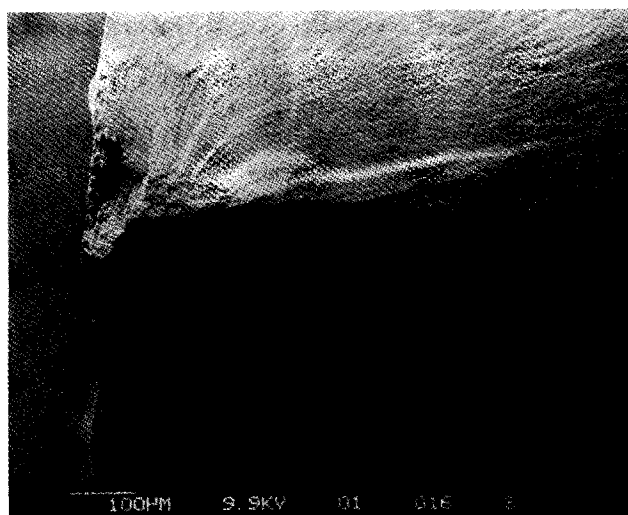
The corner of the bar shown in Fig. 4 showing the fracture-initiating defect.
